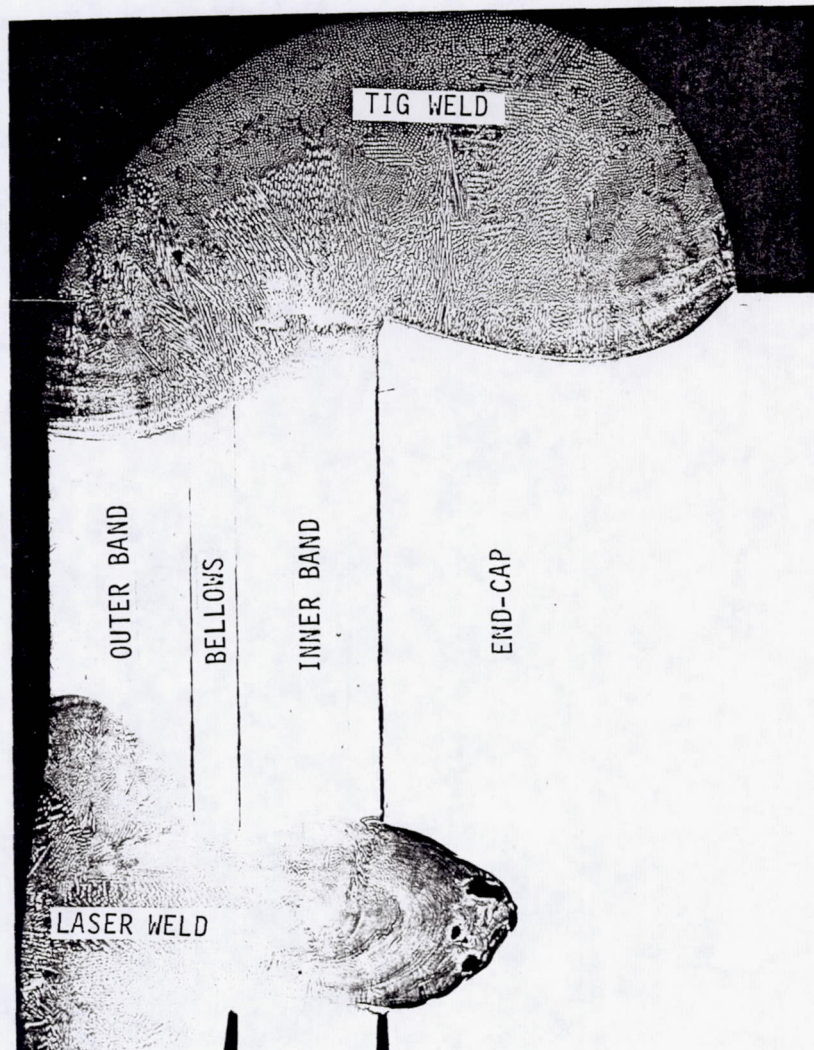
Bellows to End-Cap Termination Weld Configuration
